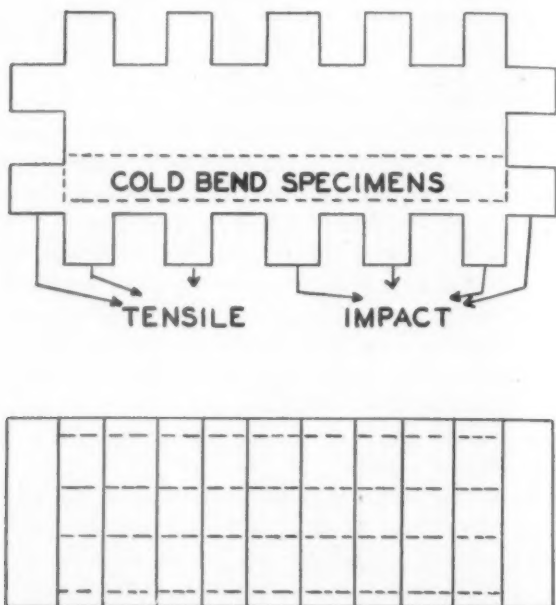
LOCATION OF TEST SAMPLES REMOVED FROM COUPON B.
